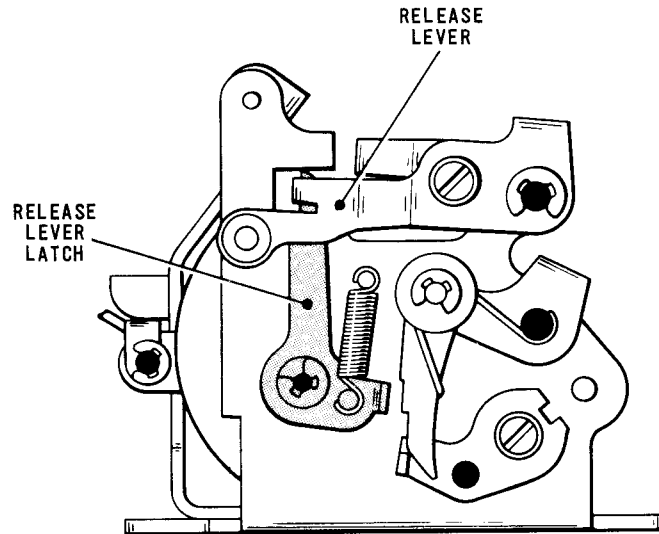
ANSWER-BACK UNIT—REAR VIEW
